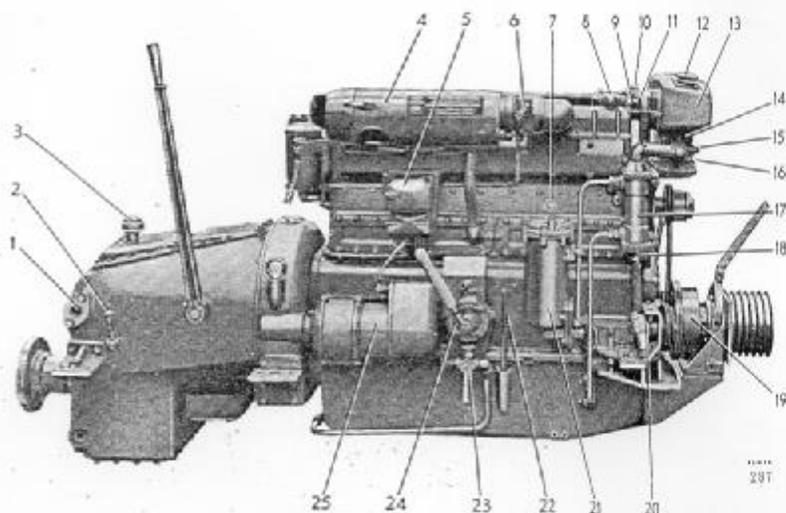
MD 96 engine with Twin Disc reverse gear and Conax power take-off.
